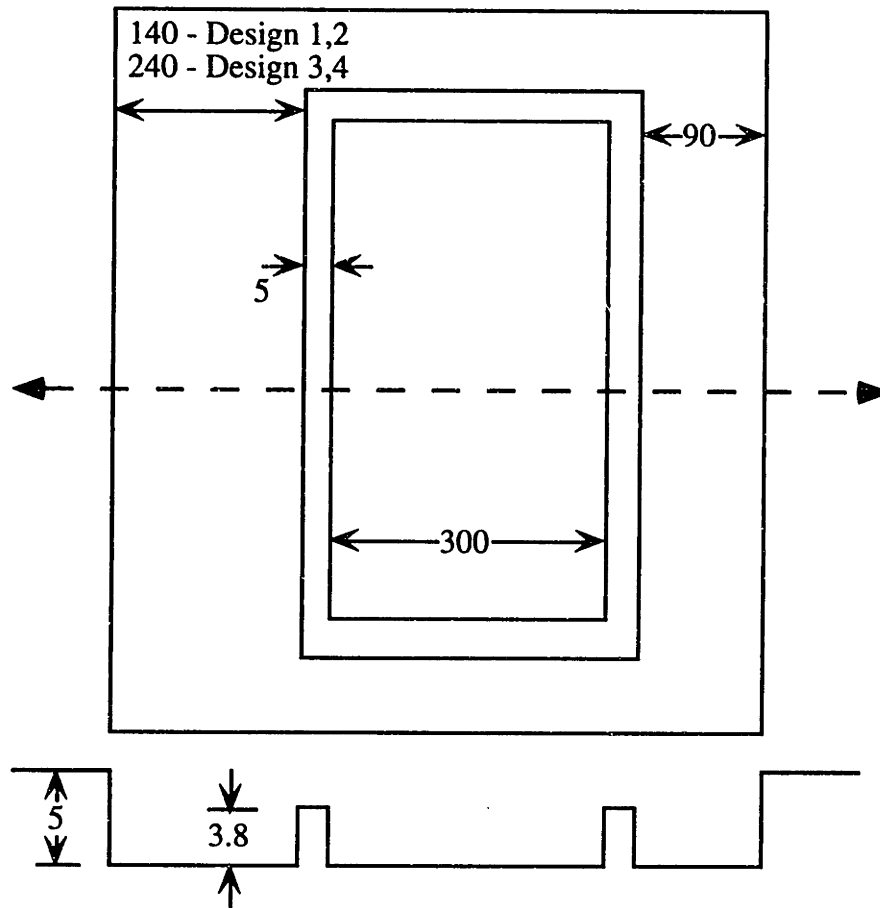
Valve seat dimensions (all dimensions in microns)
